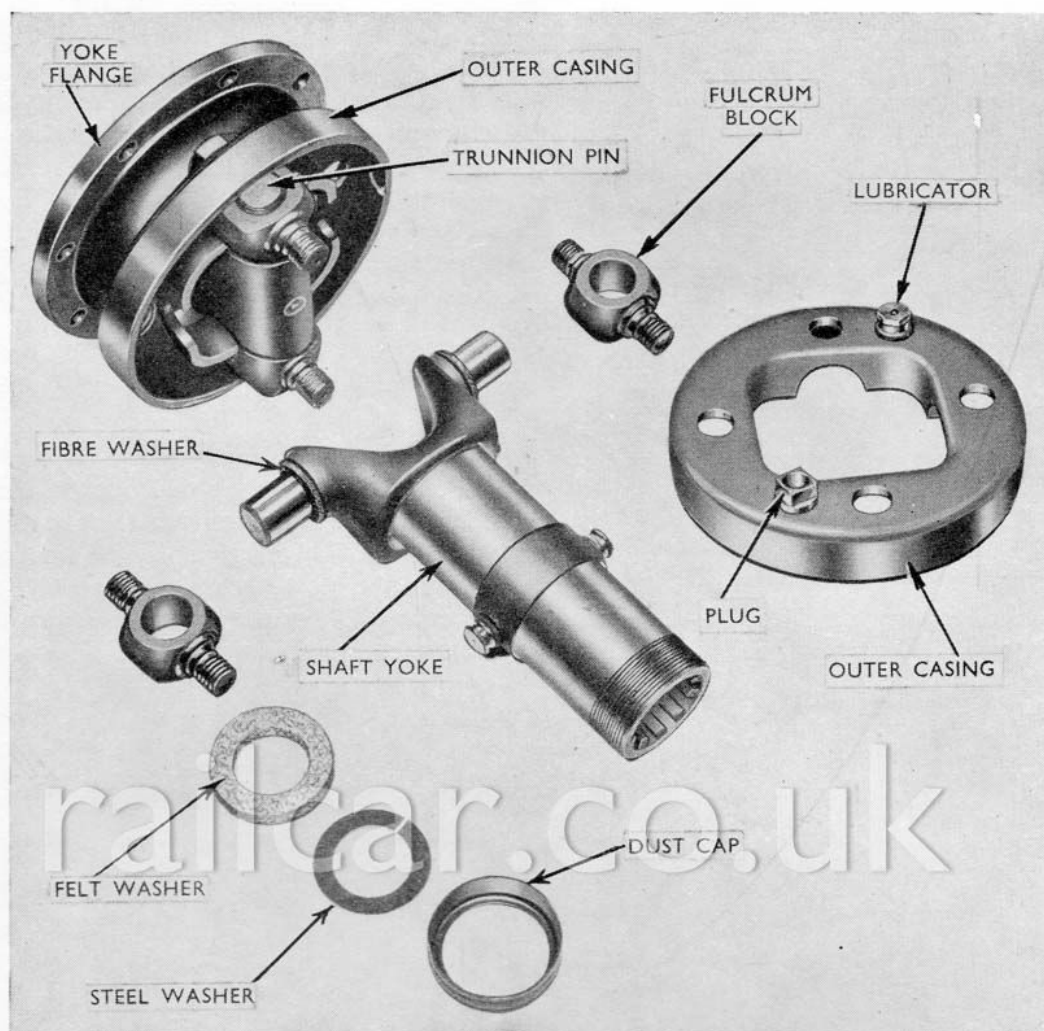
Exploded view of plain bearing type universal joint fitted to early cars.
